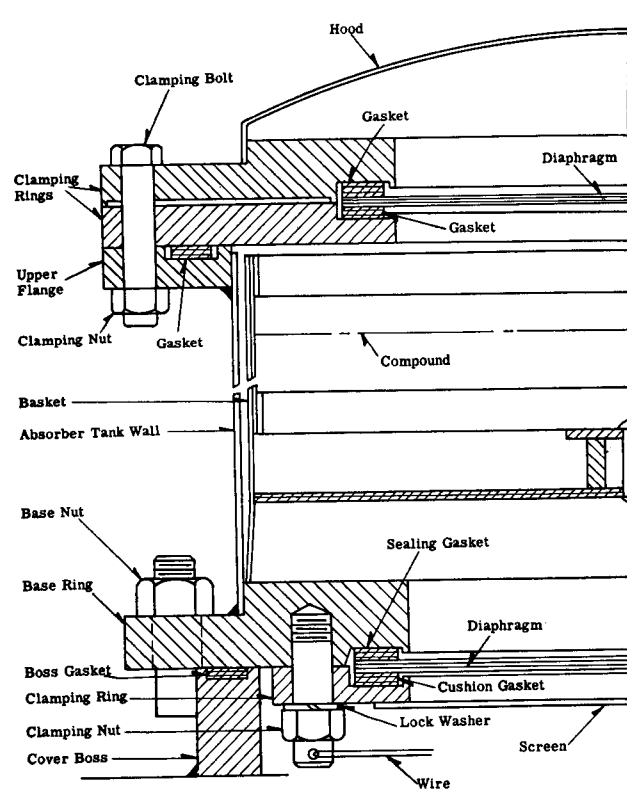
CROSS SECTIONAL VIEW, ROUND TYPE, HIGH COVER BOSS
